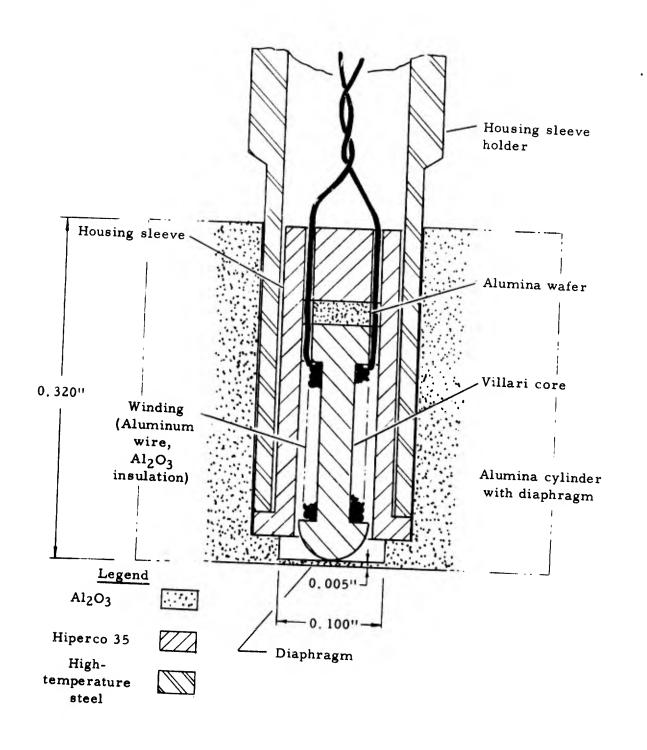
BOBBIN-CORE PRESSURE TRANSDUCER
